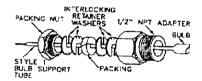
Part No. FTG13A-600 R packing nut assembly.
